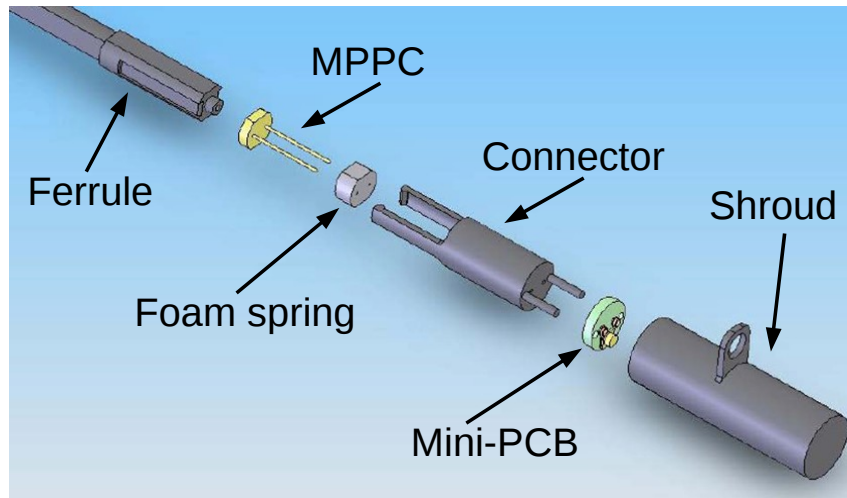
An exploded view of the MPPC and connector assembly used for the ECal and the QA setup.
